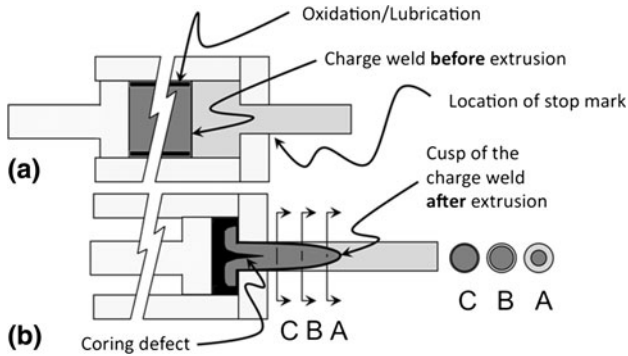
Schematic illustrations of charge weld formation in a multi-billet extrusion. The leading billet has light shading and the trailing billet is dark. The charge weld is the interface between the two billets. Positions A, B, and C show how the relative amounts of the leading and trailing billet vary along the length of the extrusion in the transition region. Oxidized material (and lubricants, if used) at the billet surface (a) accumulates at the rear of the unextruded portion of the billet, and in some cases can flow back down the axis of the extruded billet to form a “coring” defect (b)
